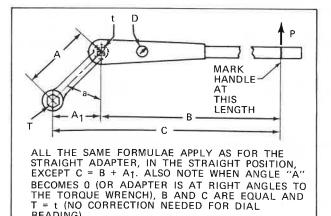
TORQUE WRENCH WITH ADAPTER APPLIED AT AN ANGLE.
